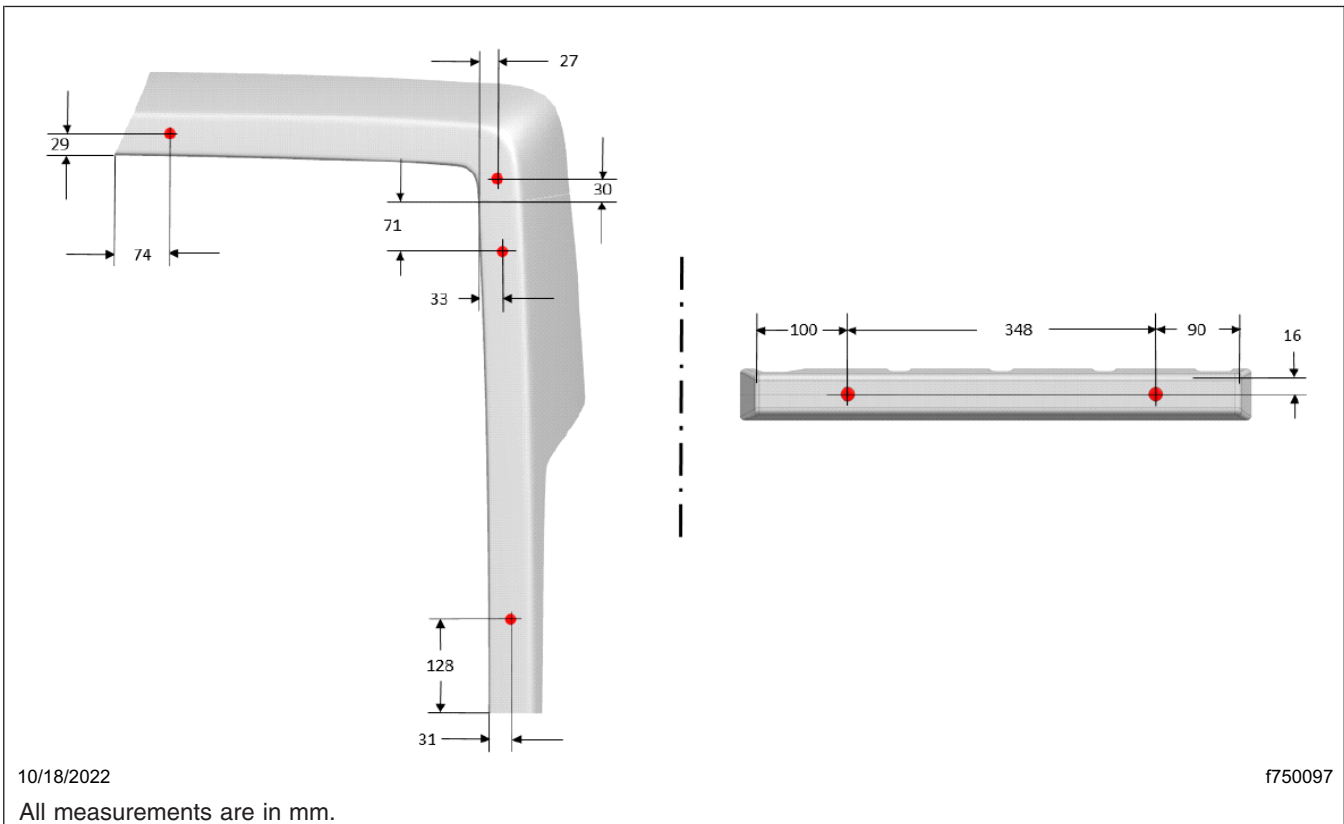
, Drilling Location Measurements (left-hand hood and grill bezels shown)
